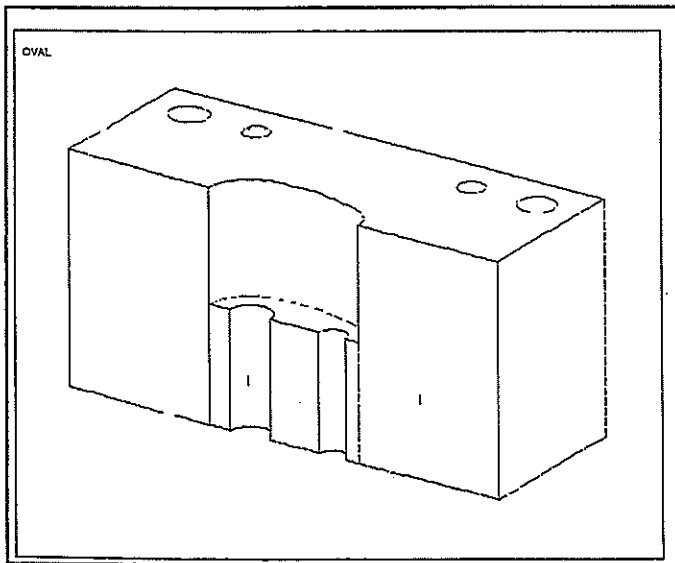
Miniblock Tooling - Oval Shape Isometric View
